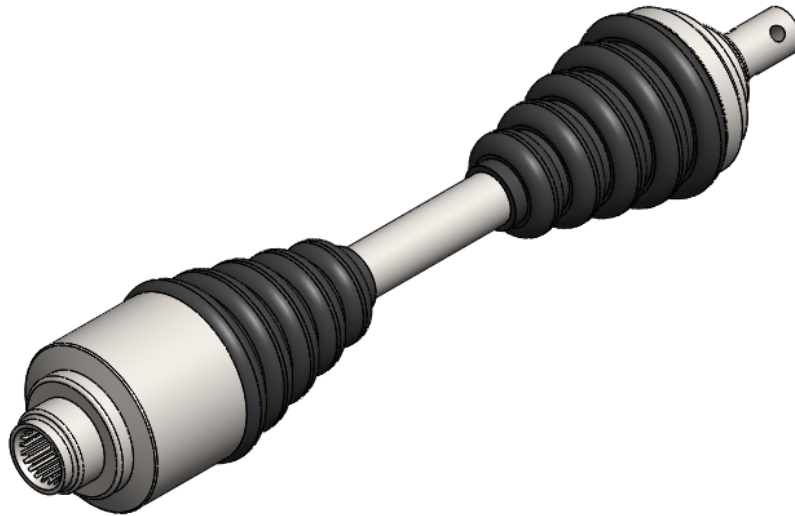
SOLIDWORKS rendering of the final CV outboard drive shaft design.
